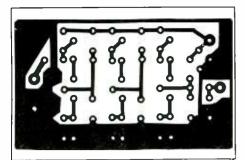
Actual-size etching-and-drilling guide for printed-circuit board.
